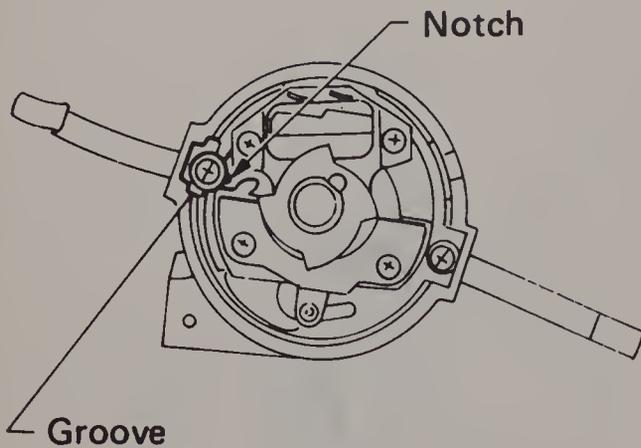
Make sure the notch in the pick-up coil plate is aligned with the groove in the housing (late Hitachi) (Sec 13)
